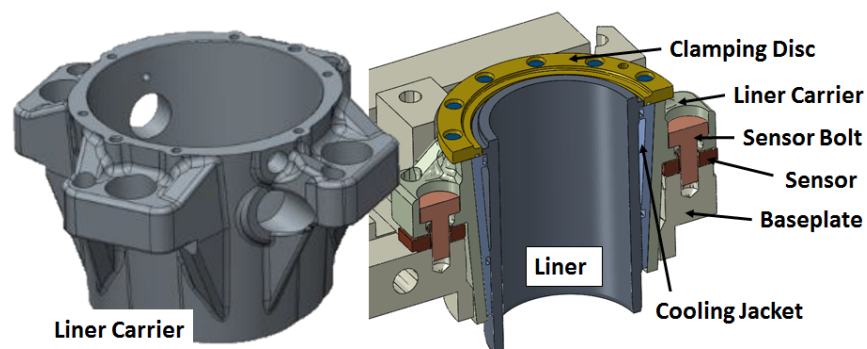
Liner carrier design for minimum liner distortion and liner assembly via carrier and force sensor package to the baseplate
